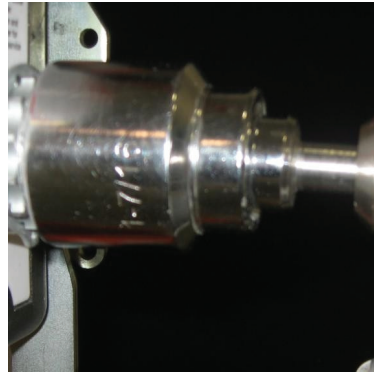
shows a direct drive configuration using the 4:1 gear reduction to allow use of a higher speed, lower torque drill if desired.
